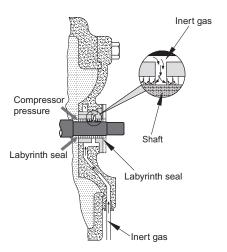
Cutaway of a labyrinth seal used in toxic service.
